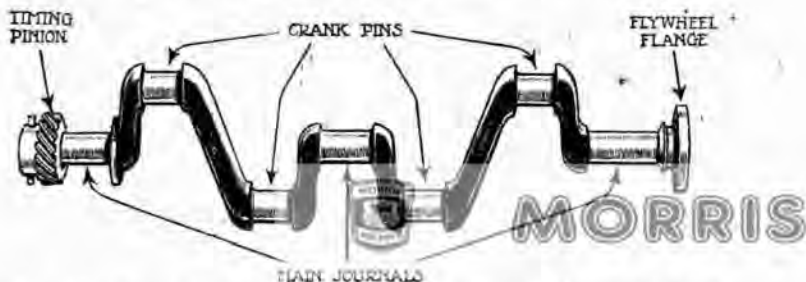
The three main journals and four crank pins of the crankshaft are machined very accurately to a high finish.
